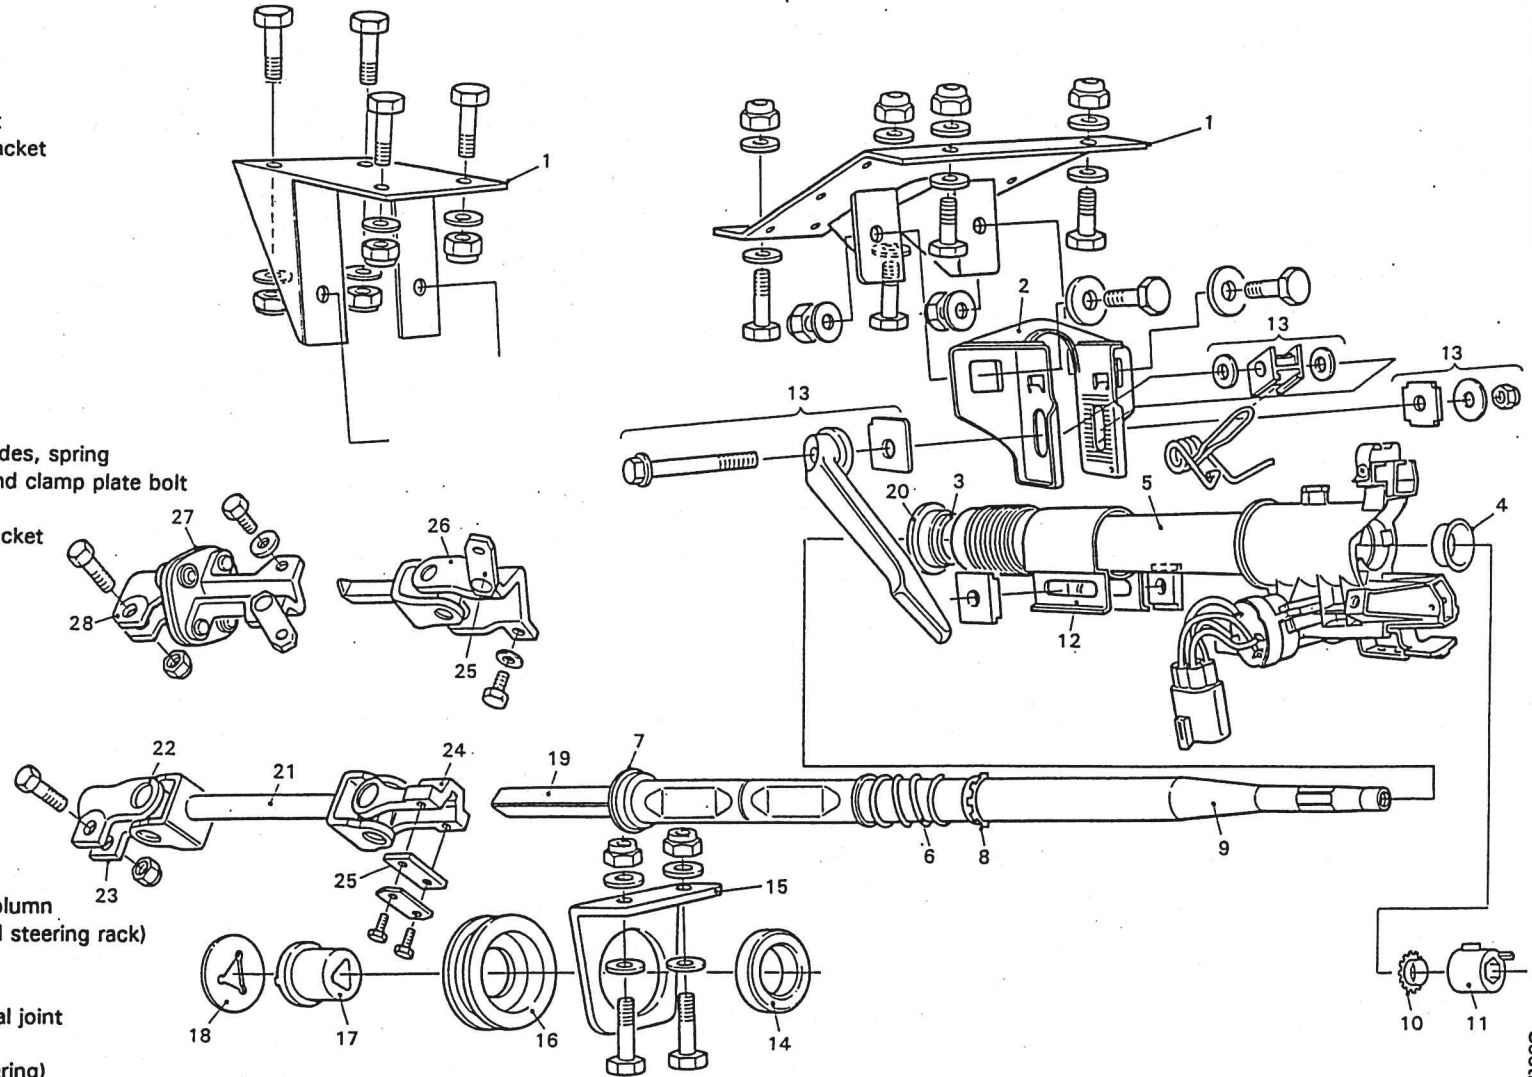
Steering Column Assembly and Joints to Steering Rack
